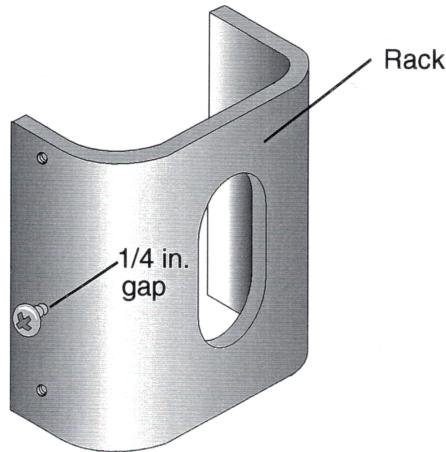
Keyhole Slot Screw with Threads Engaged, and a Gap Adequate to Fit the Mounting Bracket
